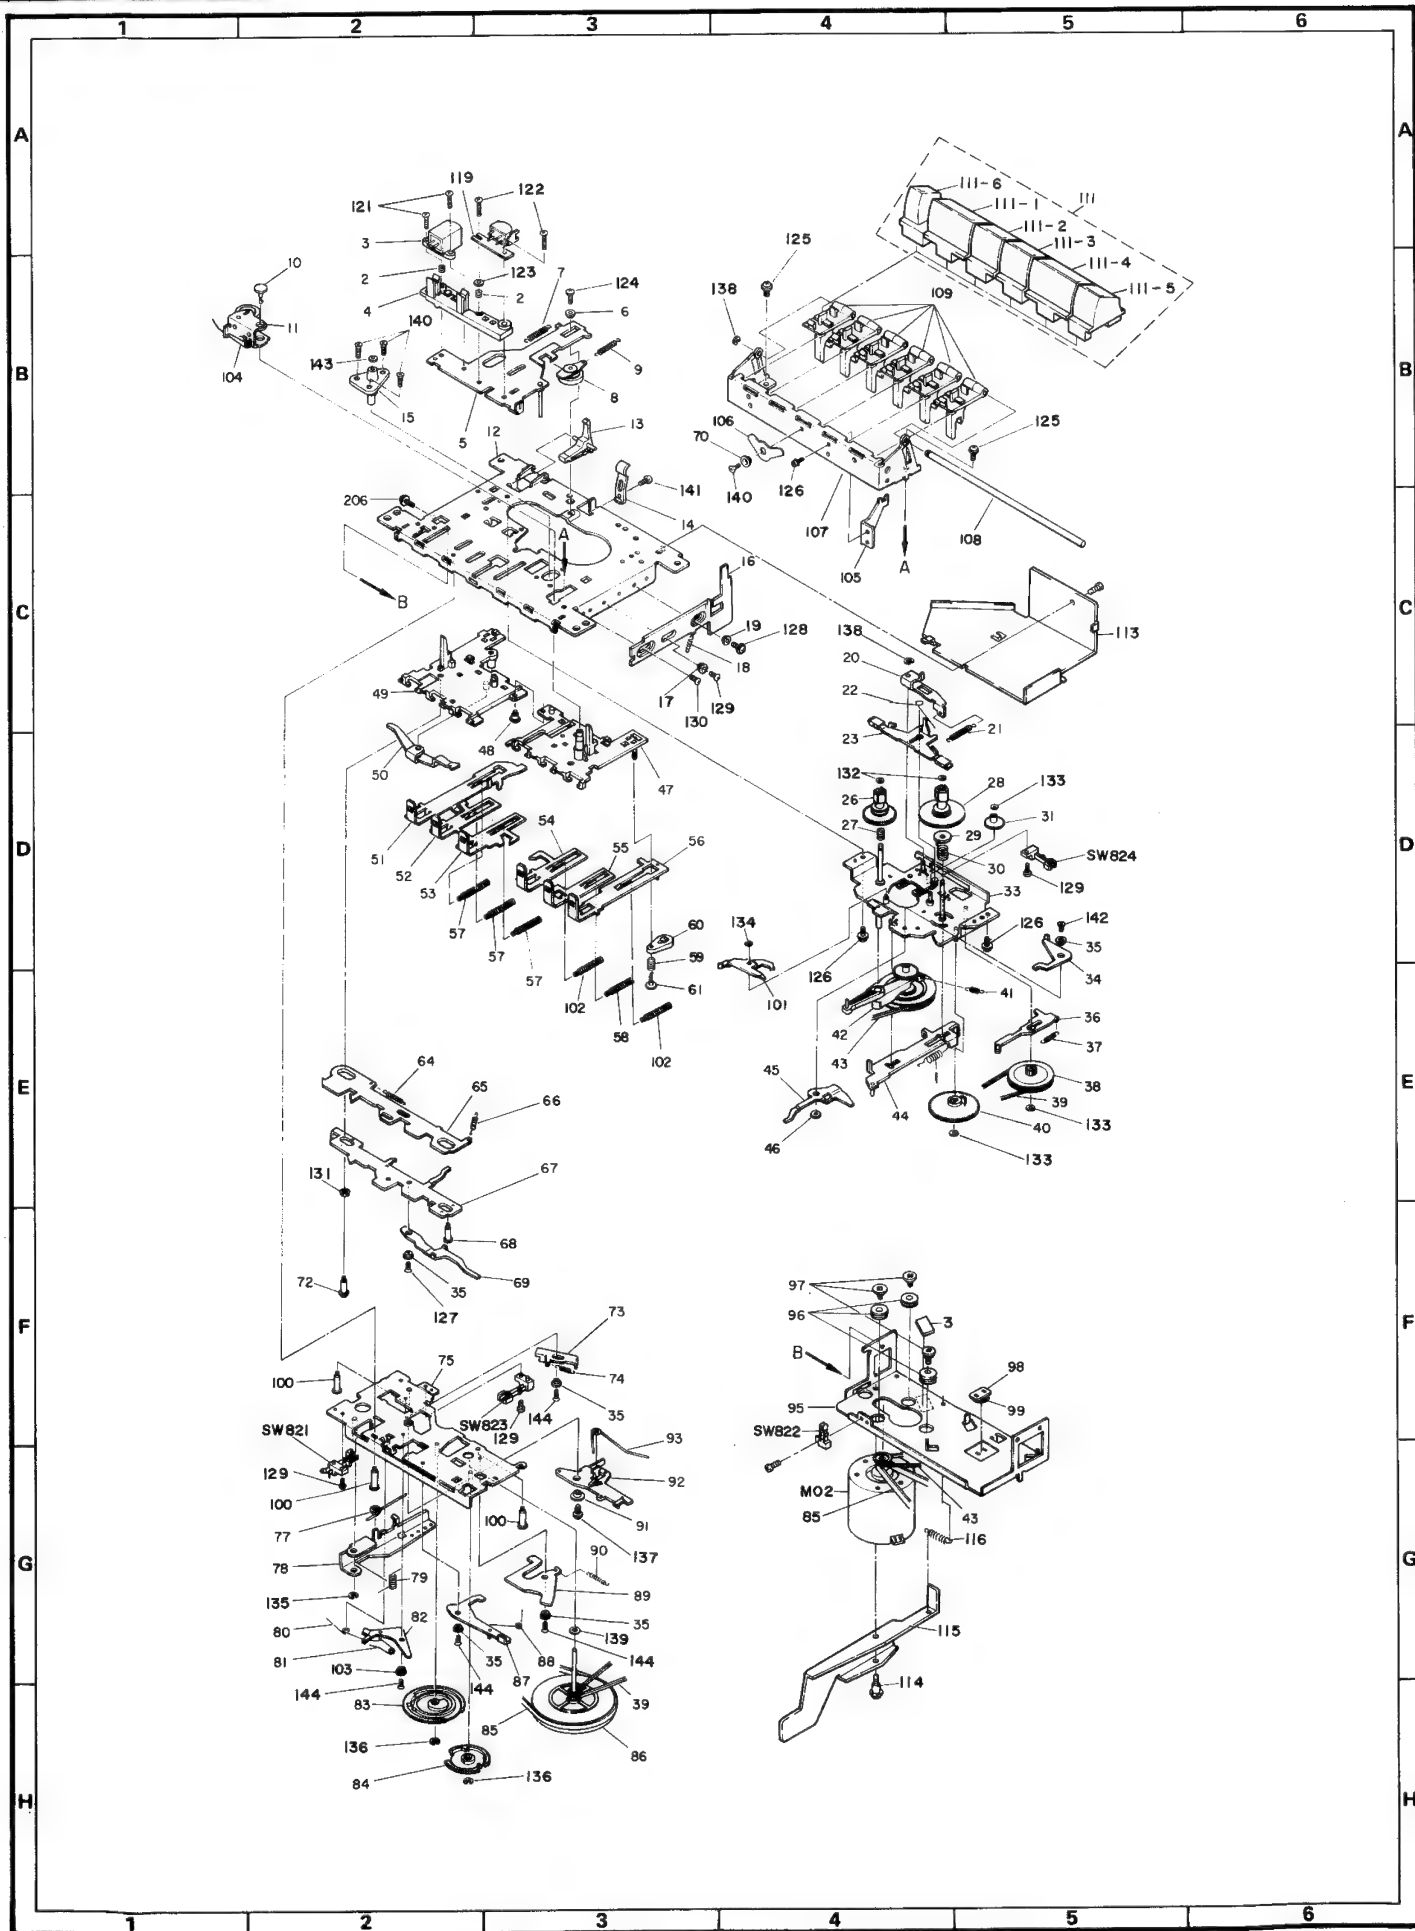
DECK 2 MECHANISM EXPLODED VIEW
